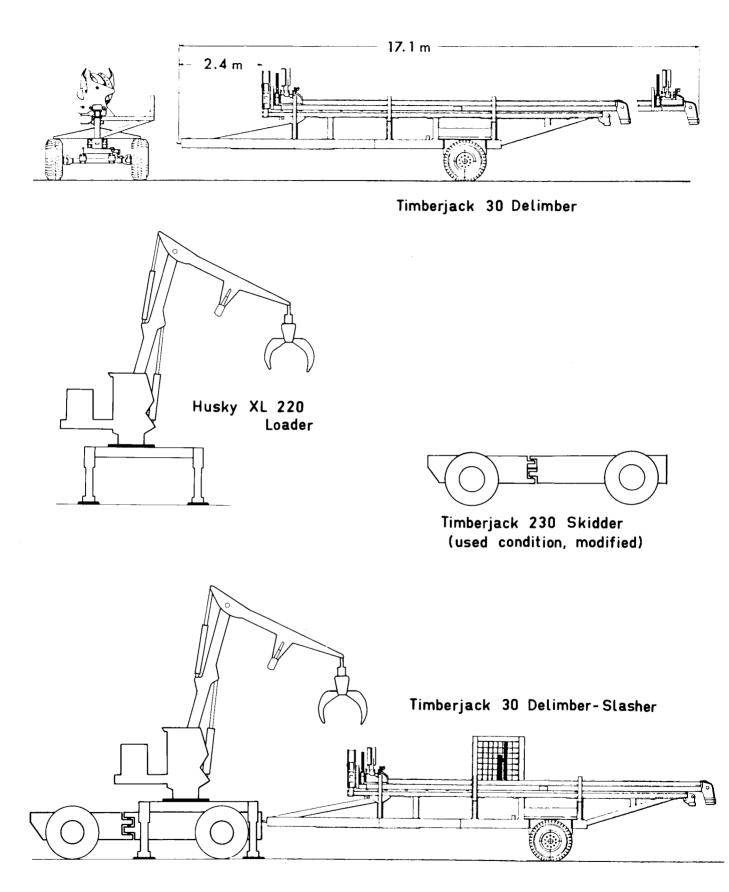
Timberjack 30 Delimber - Slasher; major components are shown.
